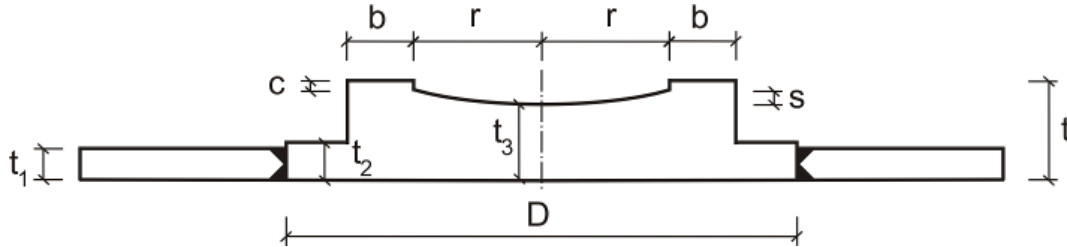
Component No. 3 – Axisymmetric bottom component of the bearing
